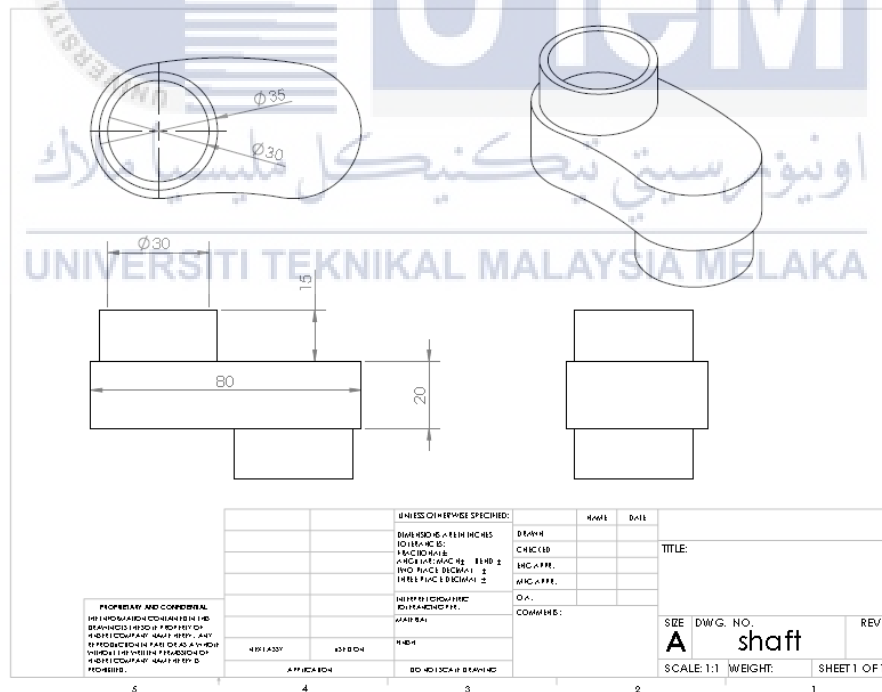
Plan CAD drawing for shaft of air duct robot
